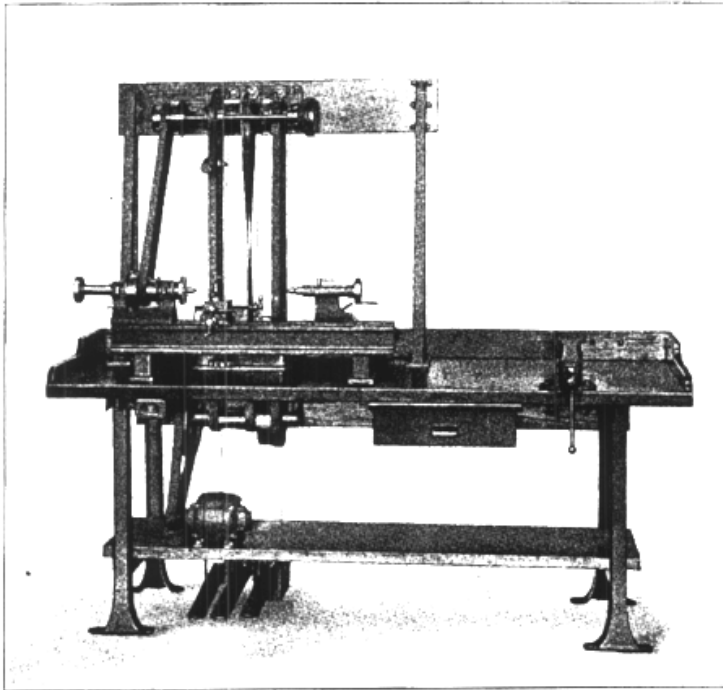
Rivett Series 507 Lathe on bench with Countershaft Plank Supports, Wall Countershaft with Grinding Countershaft Attachment, Belt Guard, Jackshaft, Motor Plank on Bench Legs, Bench Drawer and Plain Foot Treadles
